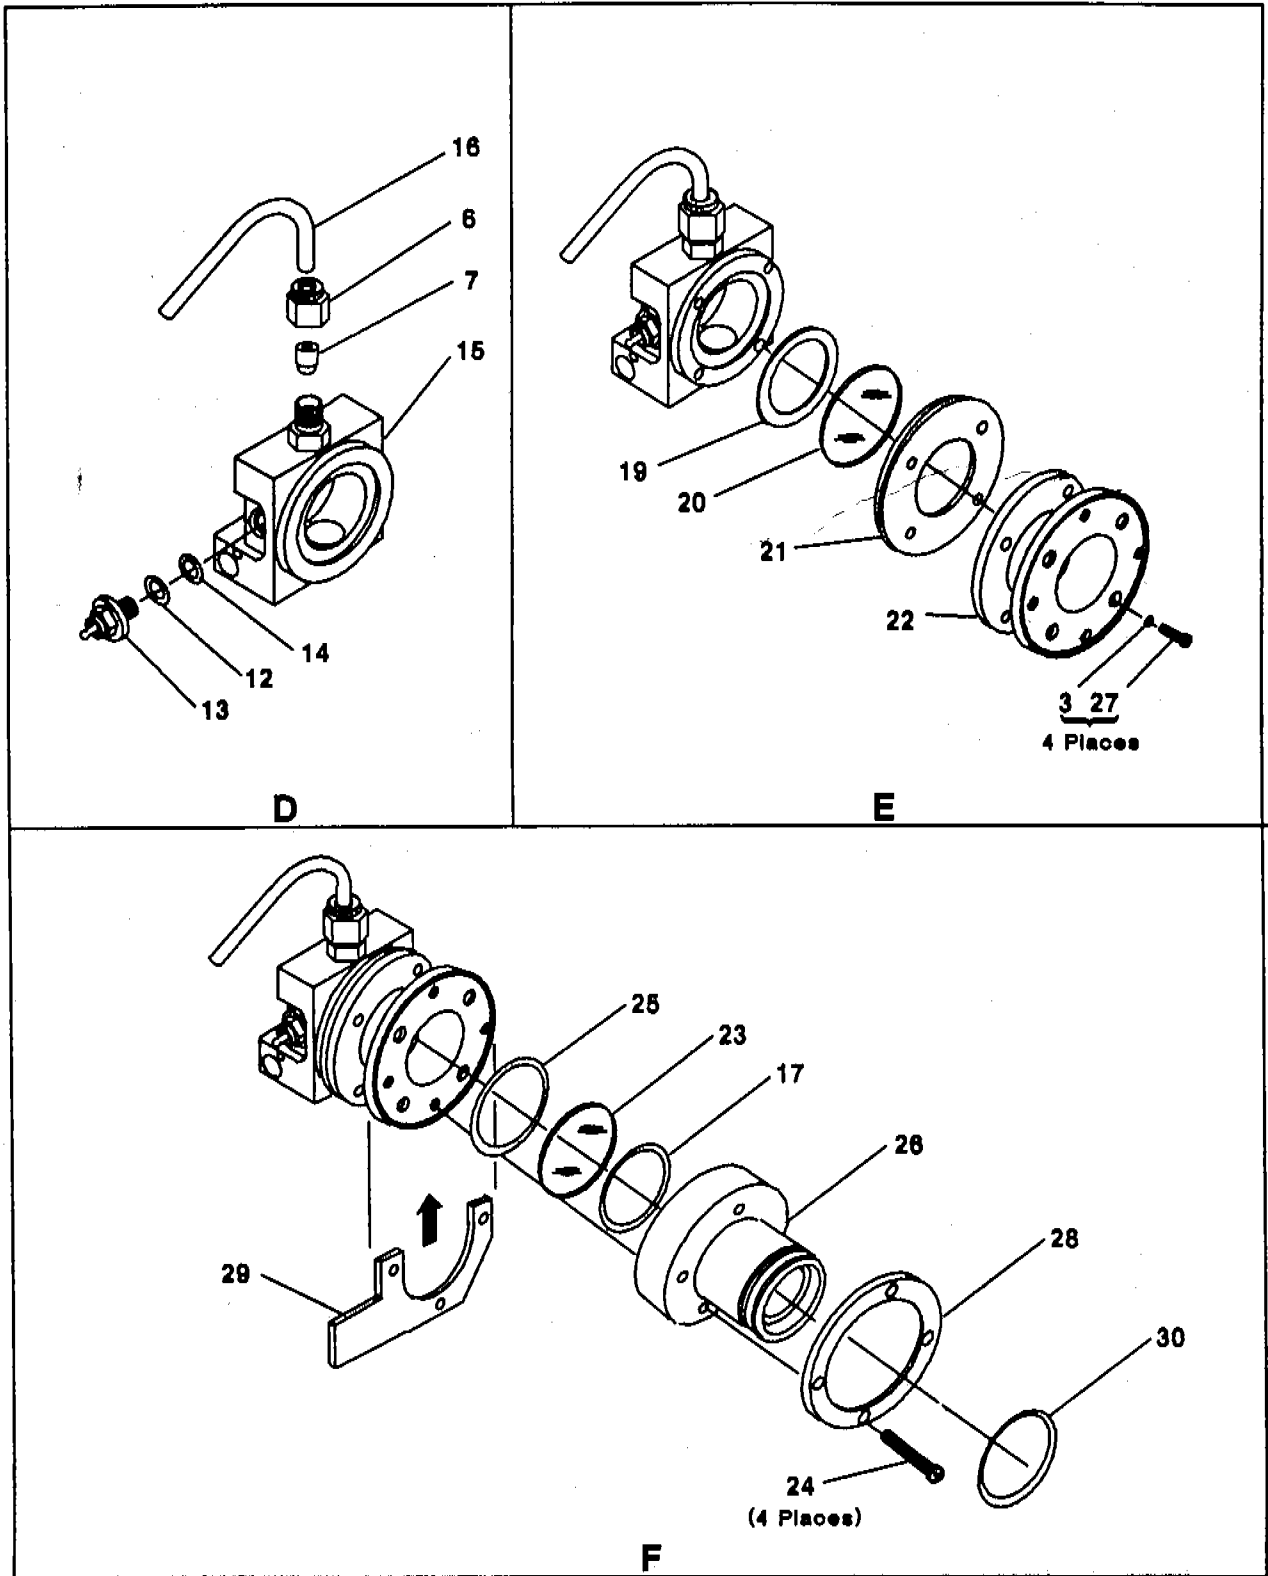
FPD Sub-assembly Parts Identification (Cont'd.)
